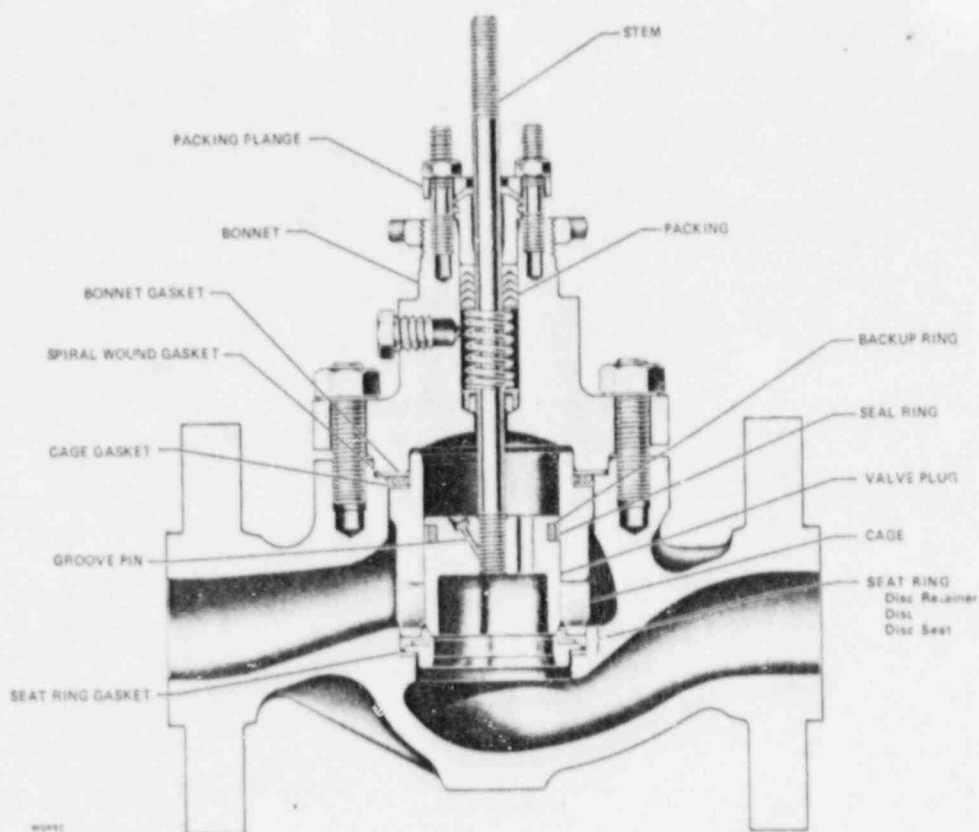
Sectional View of Design ET Valve Body with Full Size Trim
